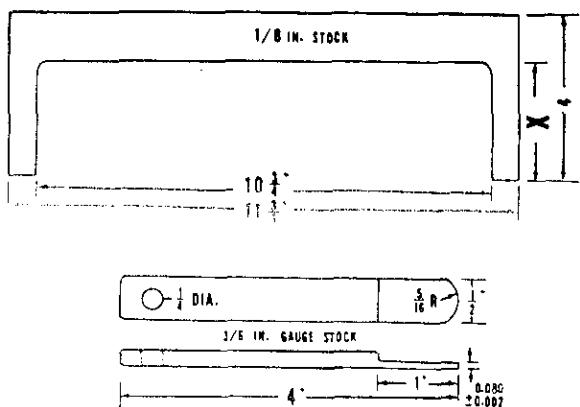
Tools used to adjust the dual plate clutch. Tools can be made locally, using the dimensions shown. Dimension "X" is 2-21/32 inches for Series B-275 and B-414 and 2-25/32 inches for Series 424, 444, 2424, 2444, 354, 364 and 384.
